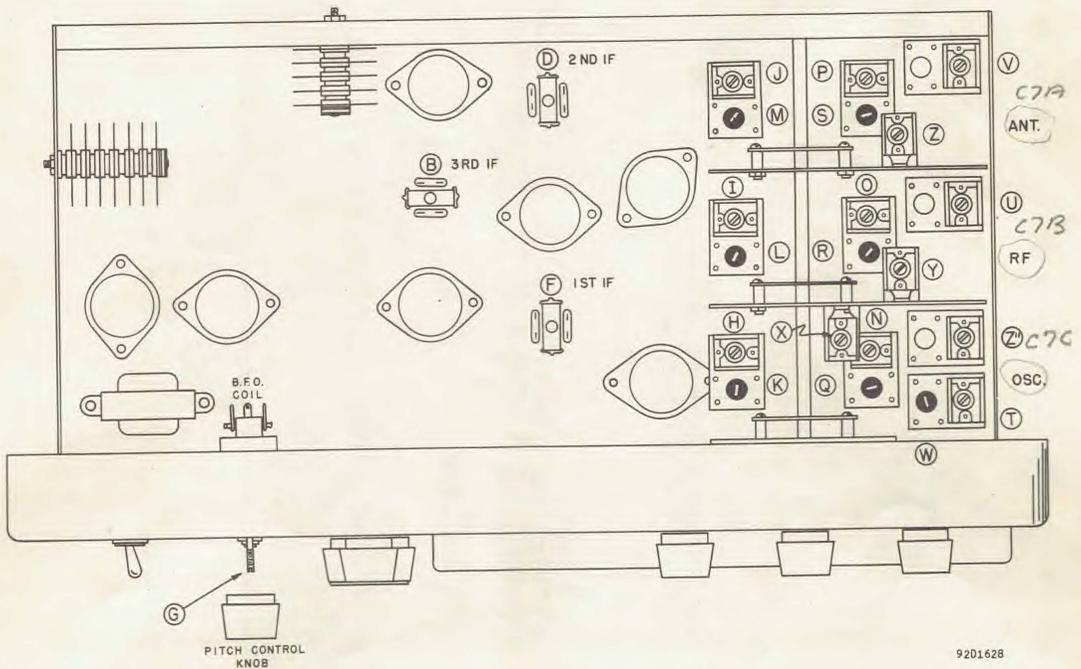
Bottom View of Chassis Showing Location of Alignment Adjustments
